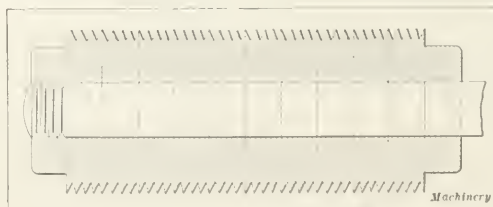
Cross-section of Milling Cutter used for cutting Teeth of Saw Blades
